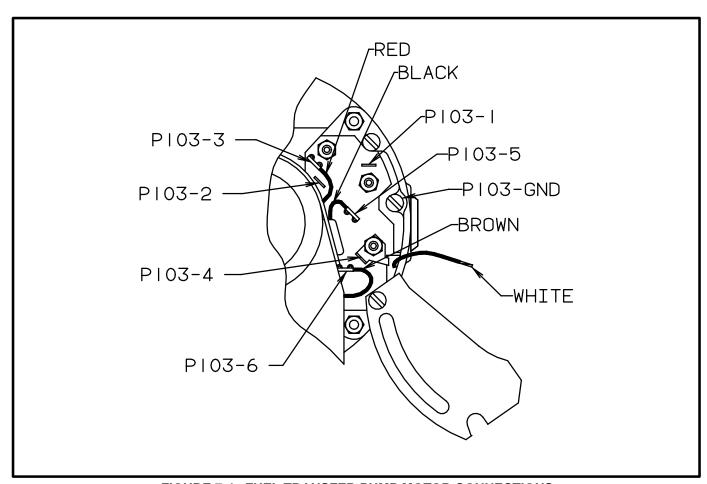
FUEL TRANSFER PUMP MOTOR CONNECTIONS
